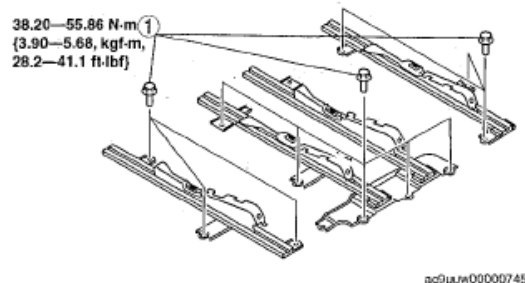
Identifying Long Slider, Bolt & Torque Specifications
